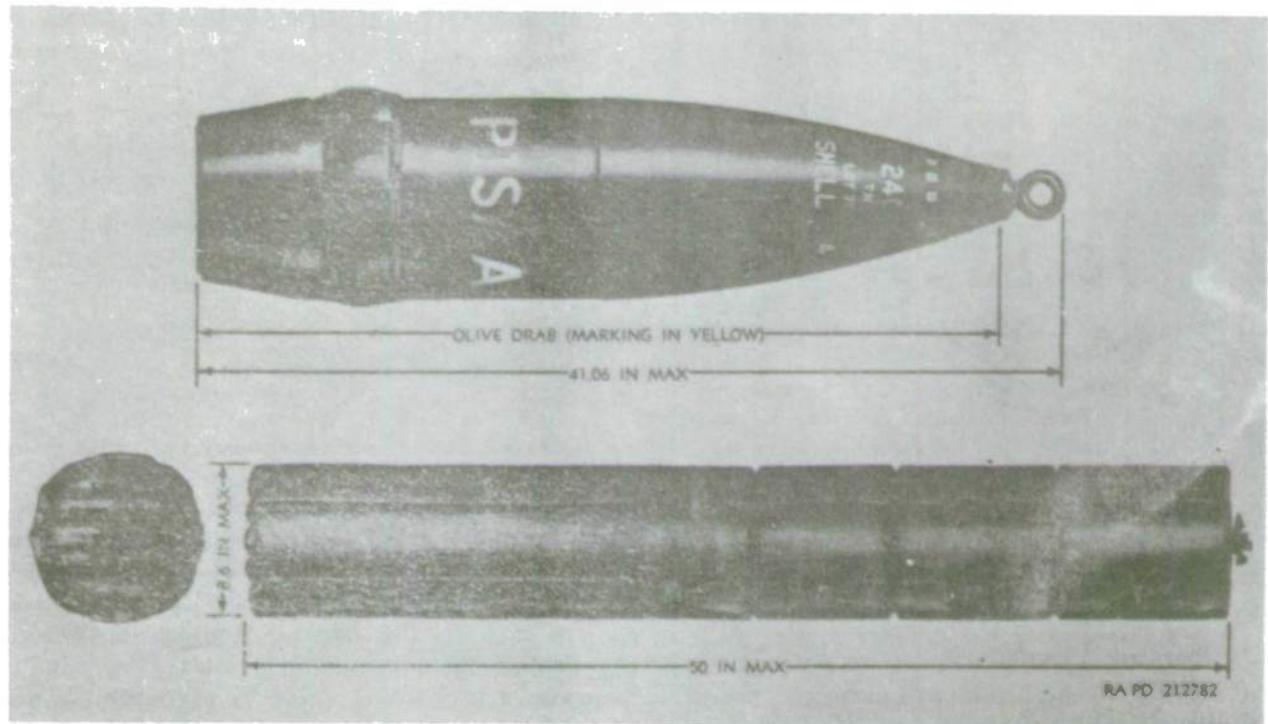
Typical Separate Loading Artillery Ammunition (Primer Not Shown)
